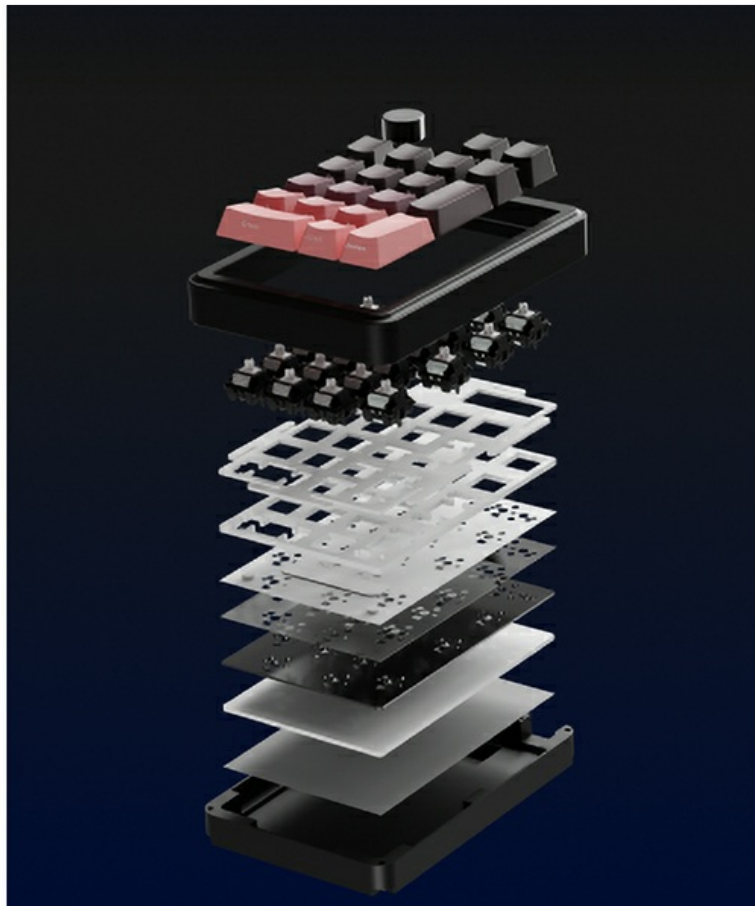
Exploded diagram illustrating the layers of the numpad's gasket structure, including PBT keycaps, upper cover, mechanical switches, positioning plate, PORON cotton, under-switch pad, PET sound optimization pad, PCB, EPDM cotton, foam, battery, and bottom shell.
